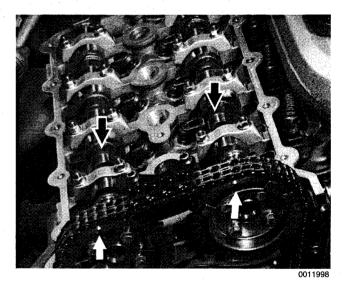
Engine set to approximate TDC. Cylinder no. 1 camshaft lobes face in and arrows on sprockets point up (arrows).
